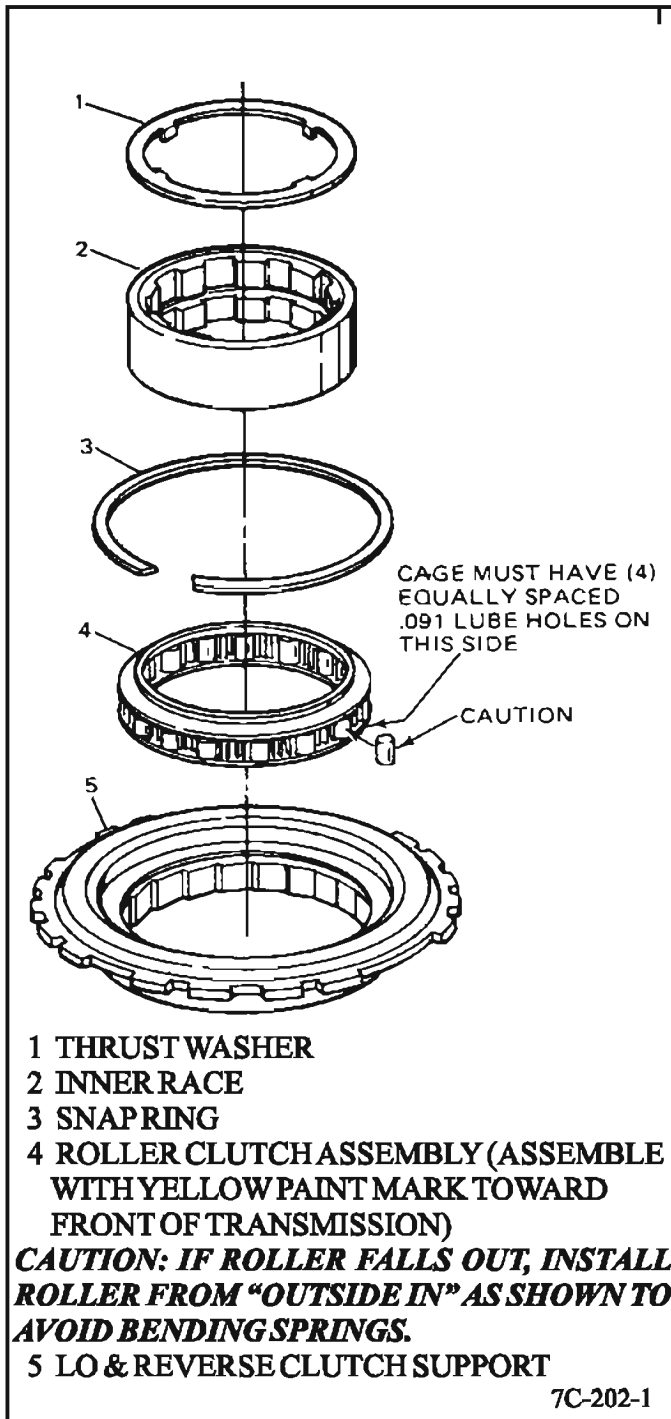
Low & Reverse Clutch Support and Overrun Roller Clutch Assembly
